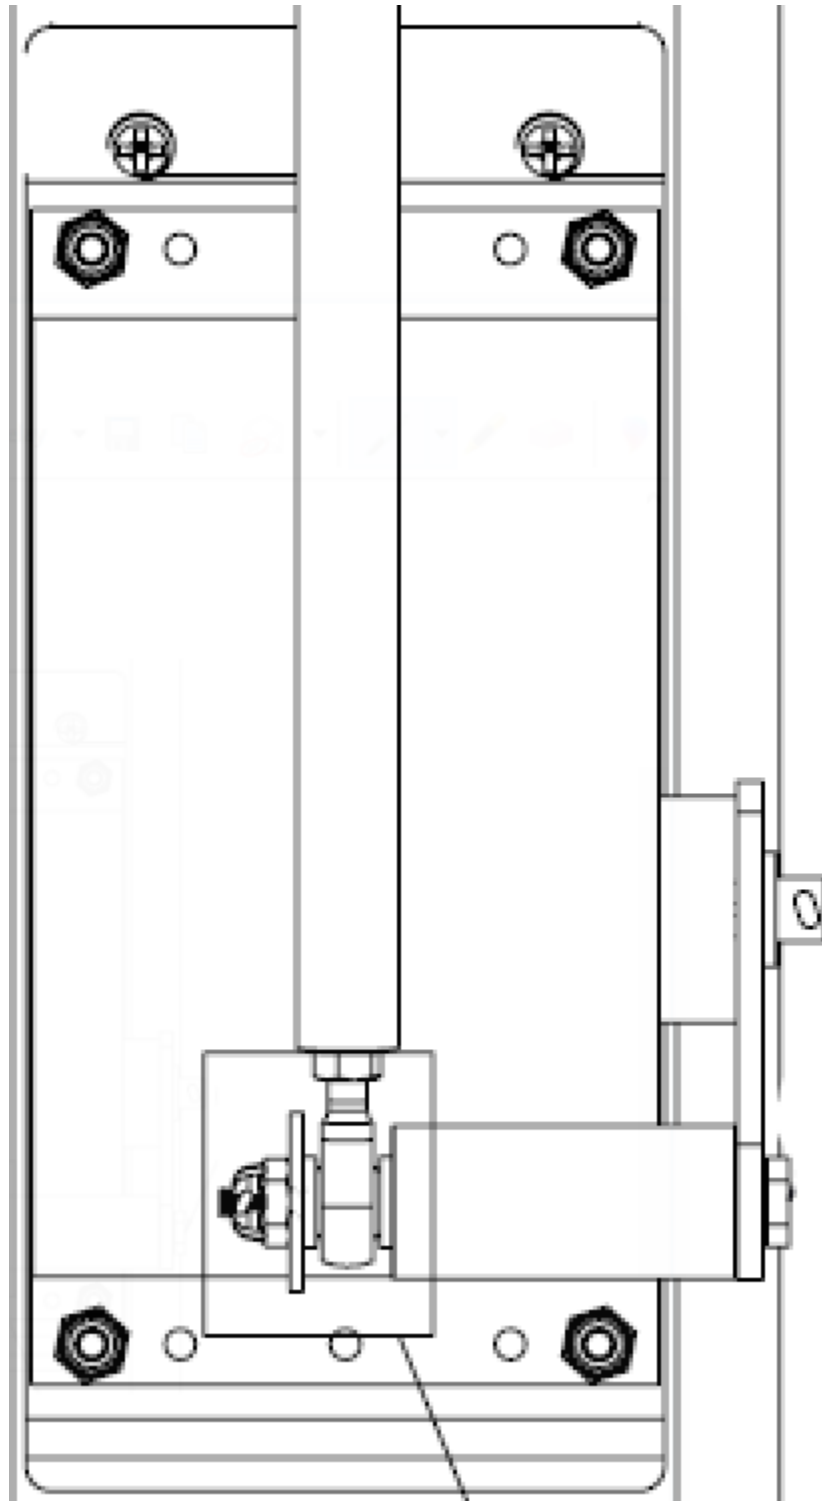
PITCH SERVO ARM ASSEMBLY
